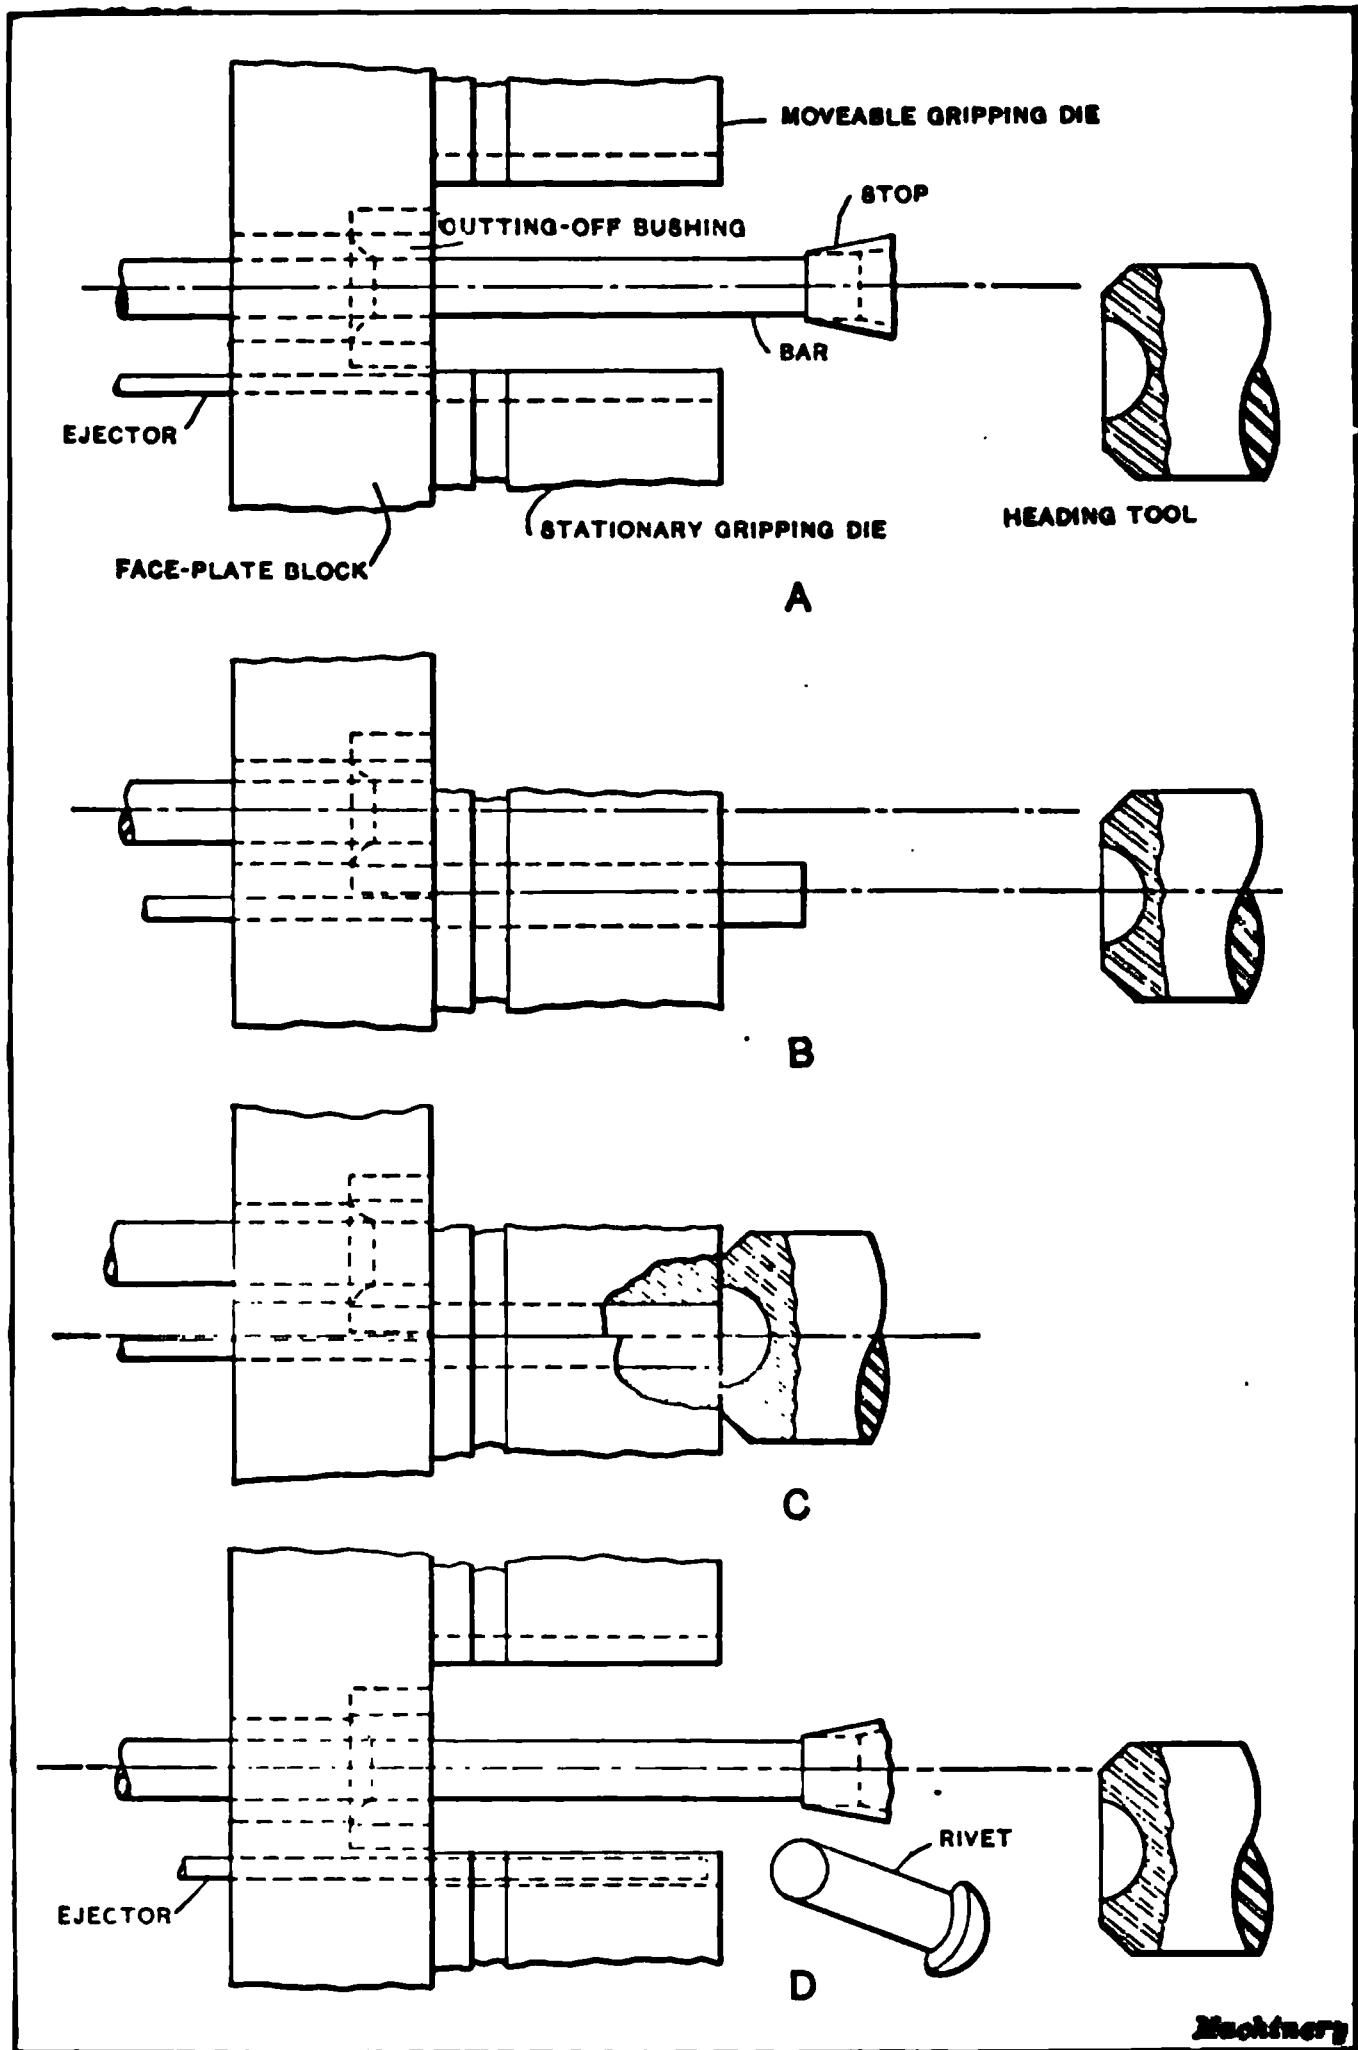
Successive Steps in the Formation of a Round-head Rivet in a Single-blow Rivet Machine of the Continuous-motion Type
